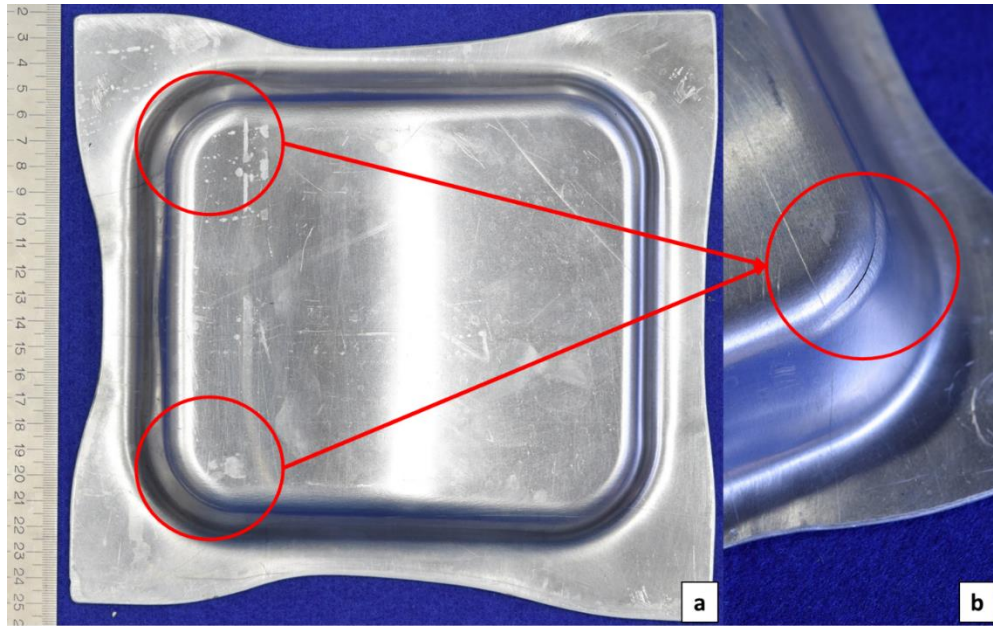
16: fractures zone on blank B12 (a) with a detailed view (b).
